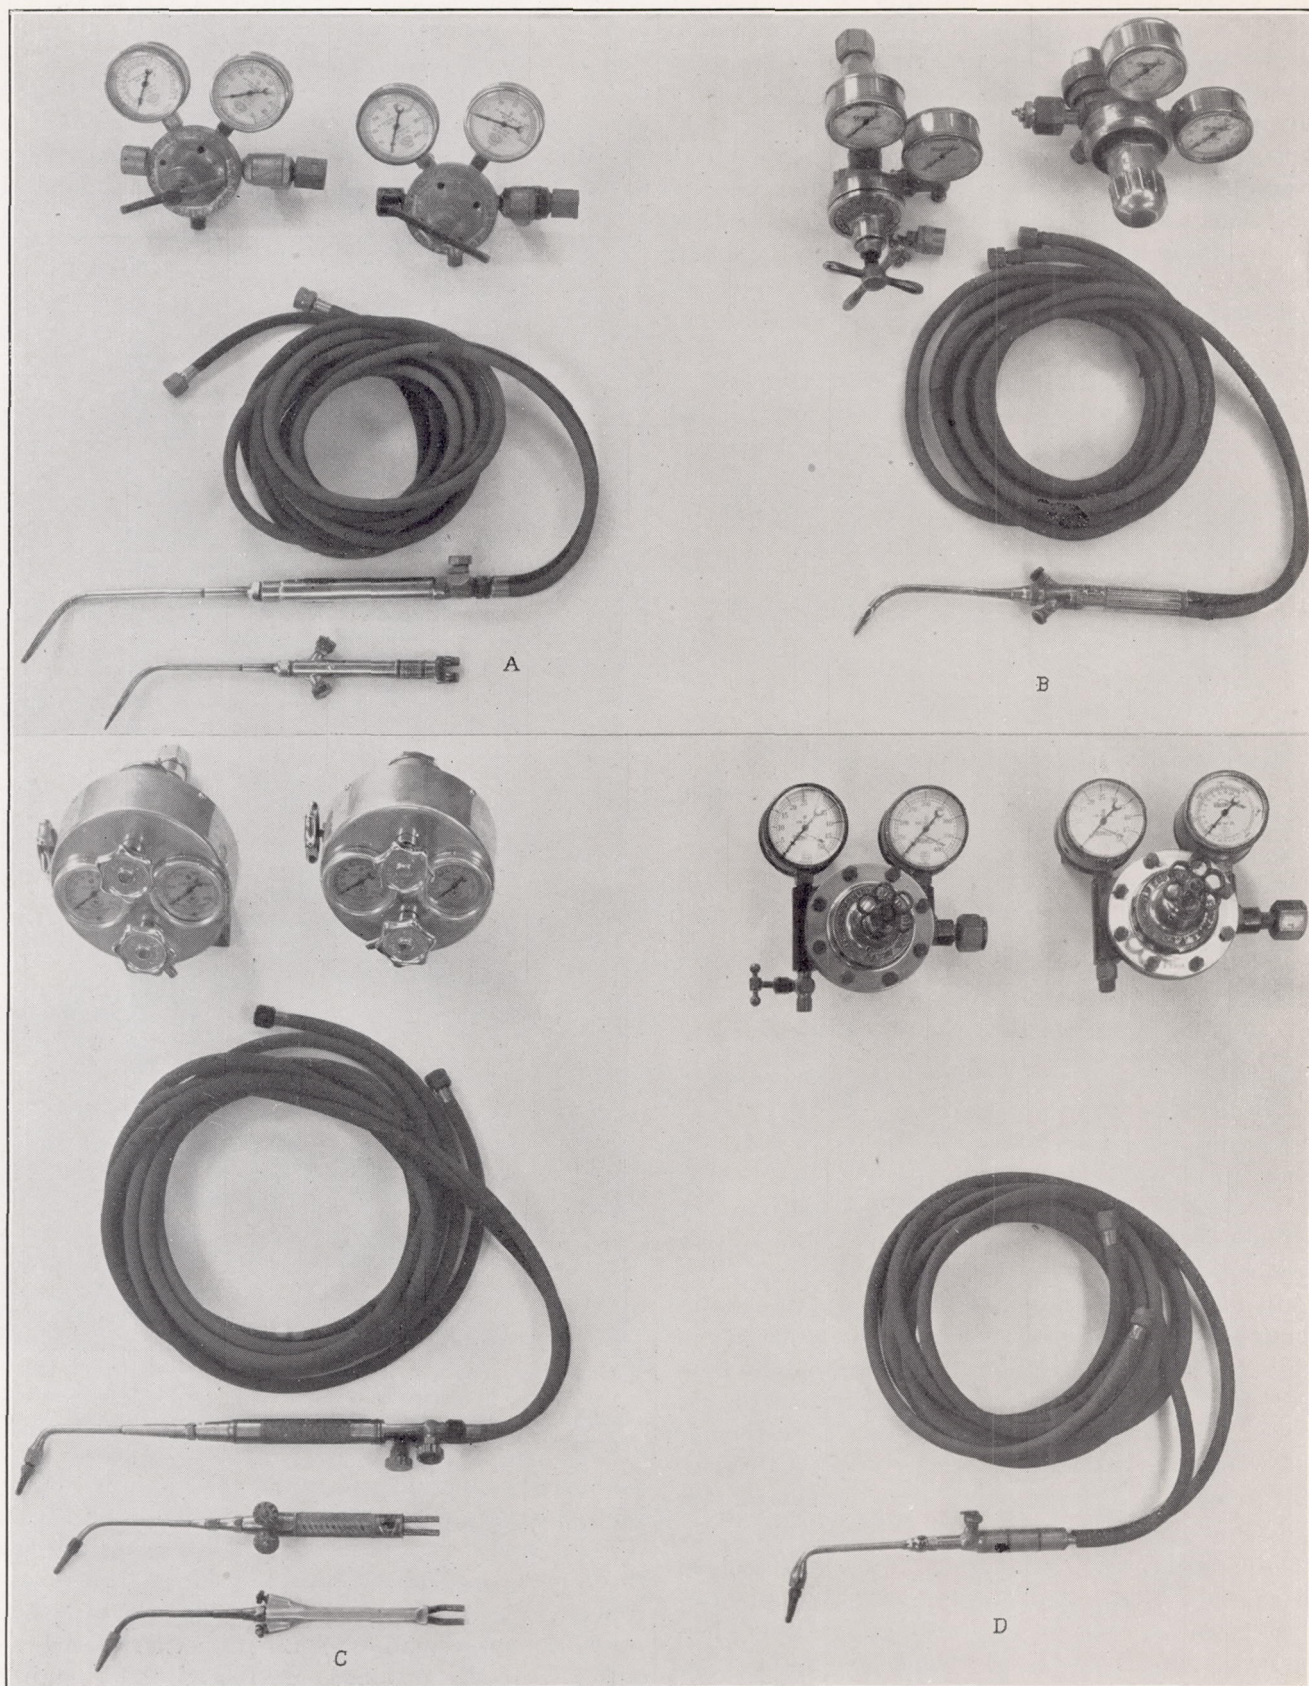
The torches and equipment used. Each set was used to weld about an equal number of specimens.
